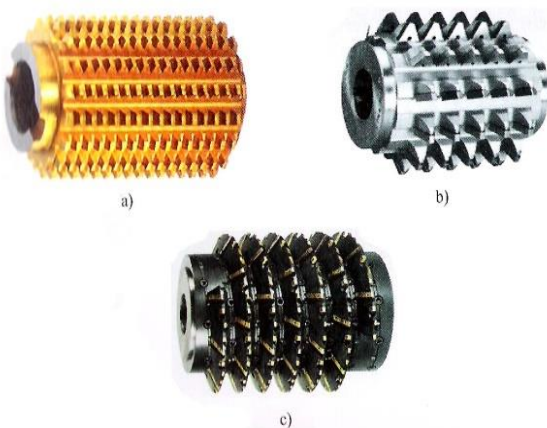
Hob milling tools (a. Integral, b. assembly, c. montage)
